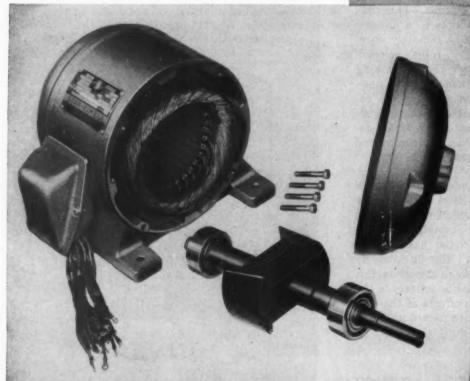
Left—Positioning motor showing frame, stator core, two-pole permanent magnet rotor and end bracket
